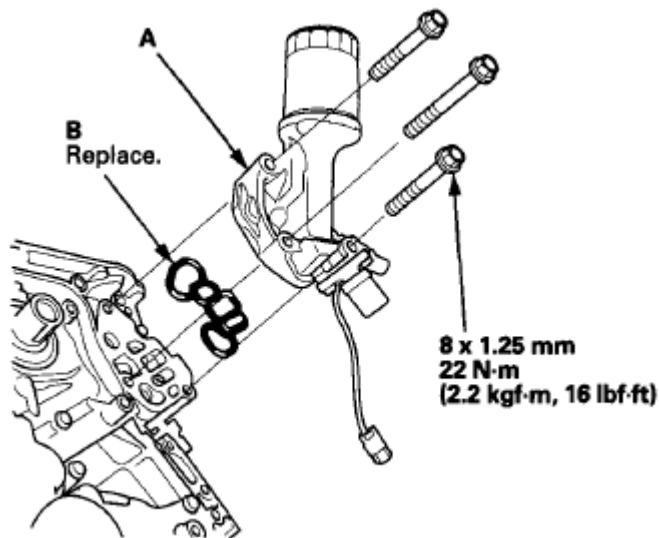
Installing Rocker Arm Oil Control Solenoid/Oil Filter Assembly, Solenoid Filter With Torque Specifications
